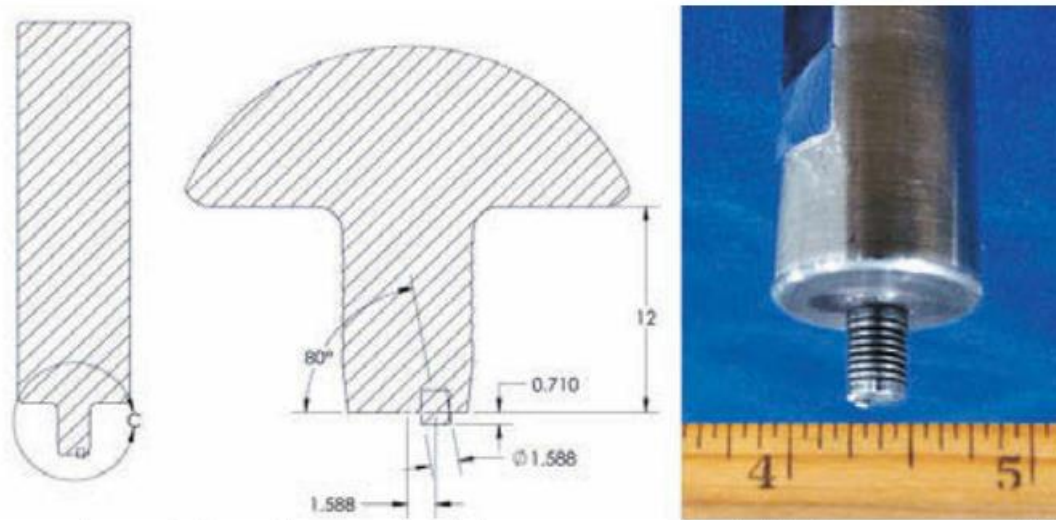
On the left is an illustration of the FSW tool, showcasing the Tungsten Carbide insert positioned in both straight and tilted orientations. On the right is a photograph of the actual tool utilized for welding, featuring a tilted scribe configuration.
